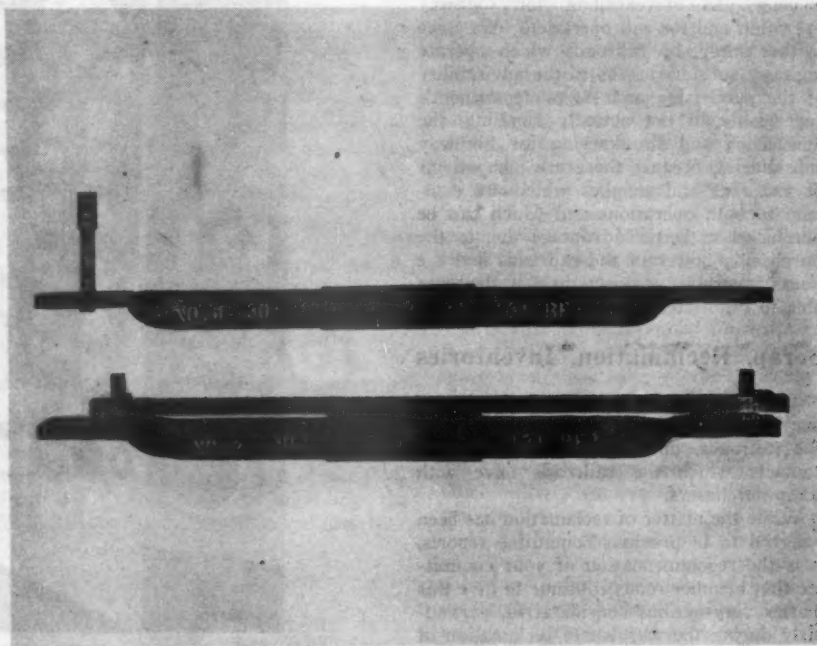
(Upper)—Flat Limit-of-Wear, Plug Type Gauge Used in Measuring Wear in Bolt Holes of Switch Rod. (Lower)—Gage Used to Check Distance Between Holes
